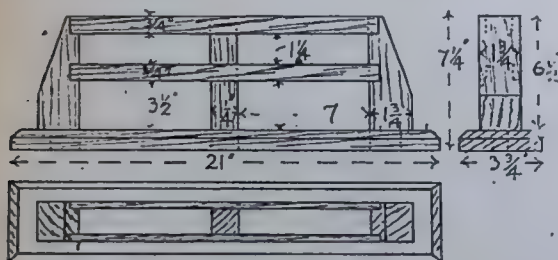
ELEVATIONS AND PLAN OF RACK.
